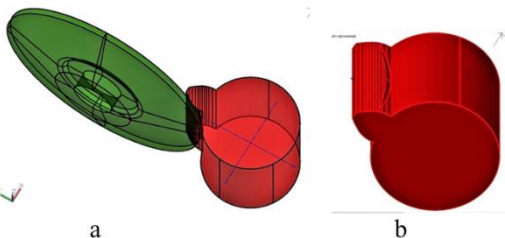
Contact area between the dished grinding wheel (a) and the lower part of the involute profile (b)
